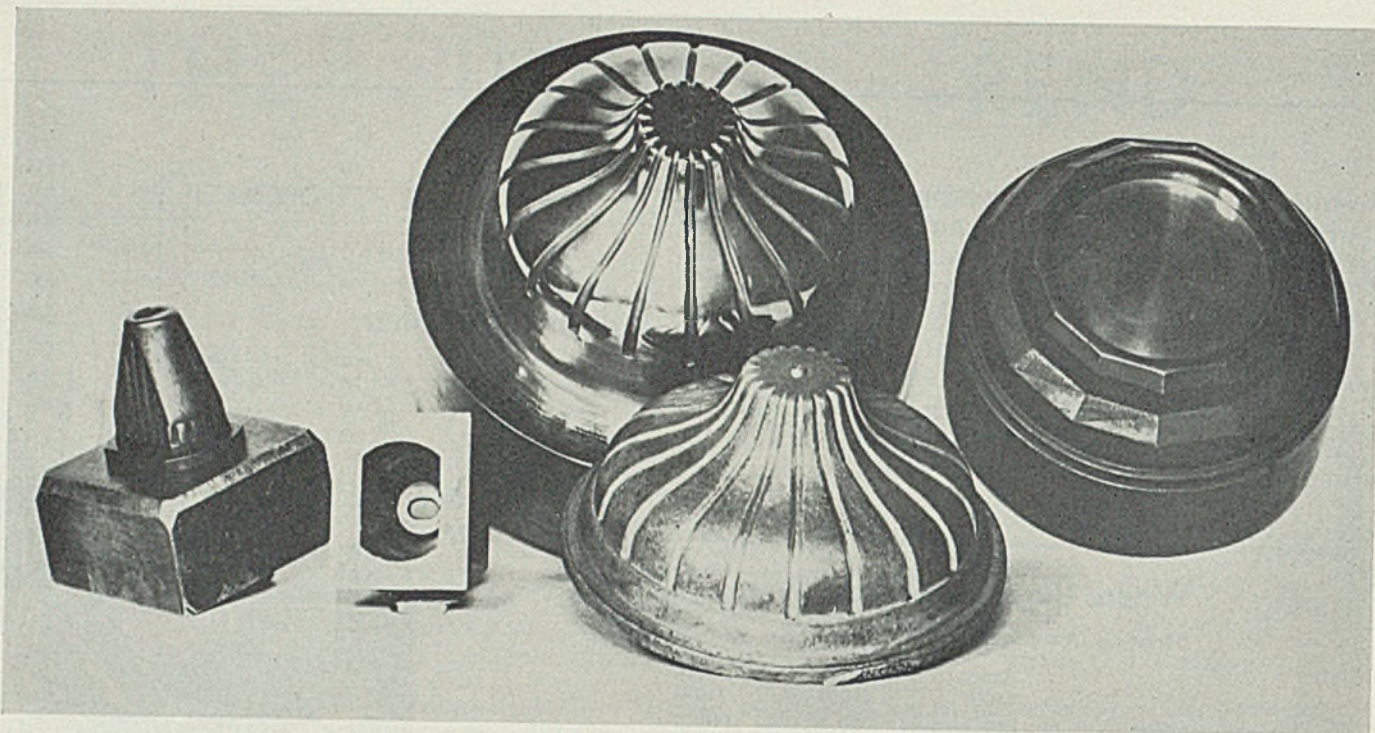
(left to right)—A master hob and press cavity mold for an electric extension cord plug housing; a master hob and zinc-base casting for an electric lamp base; and a master hob for a rubber barber spray mold
